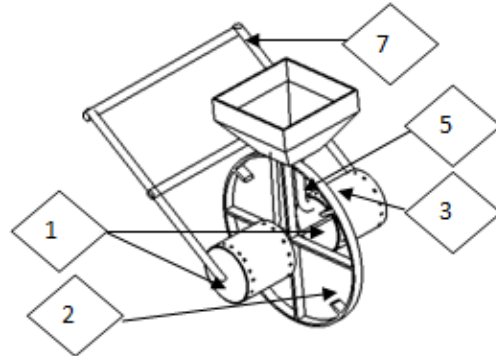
An isometric view of the assembled product of the designed *melkassa* seeder, and its part, 1 Drum side cover plates, 2 Lugs, 3 Drums, with holes around, 4 Ground wheel, 5 Feeder hoses, 6 Seed hopper, 7 handle.
